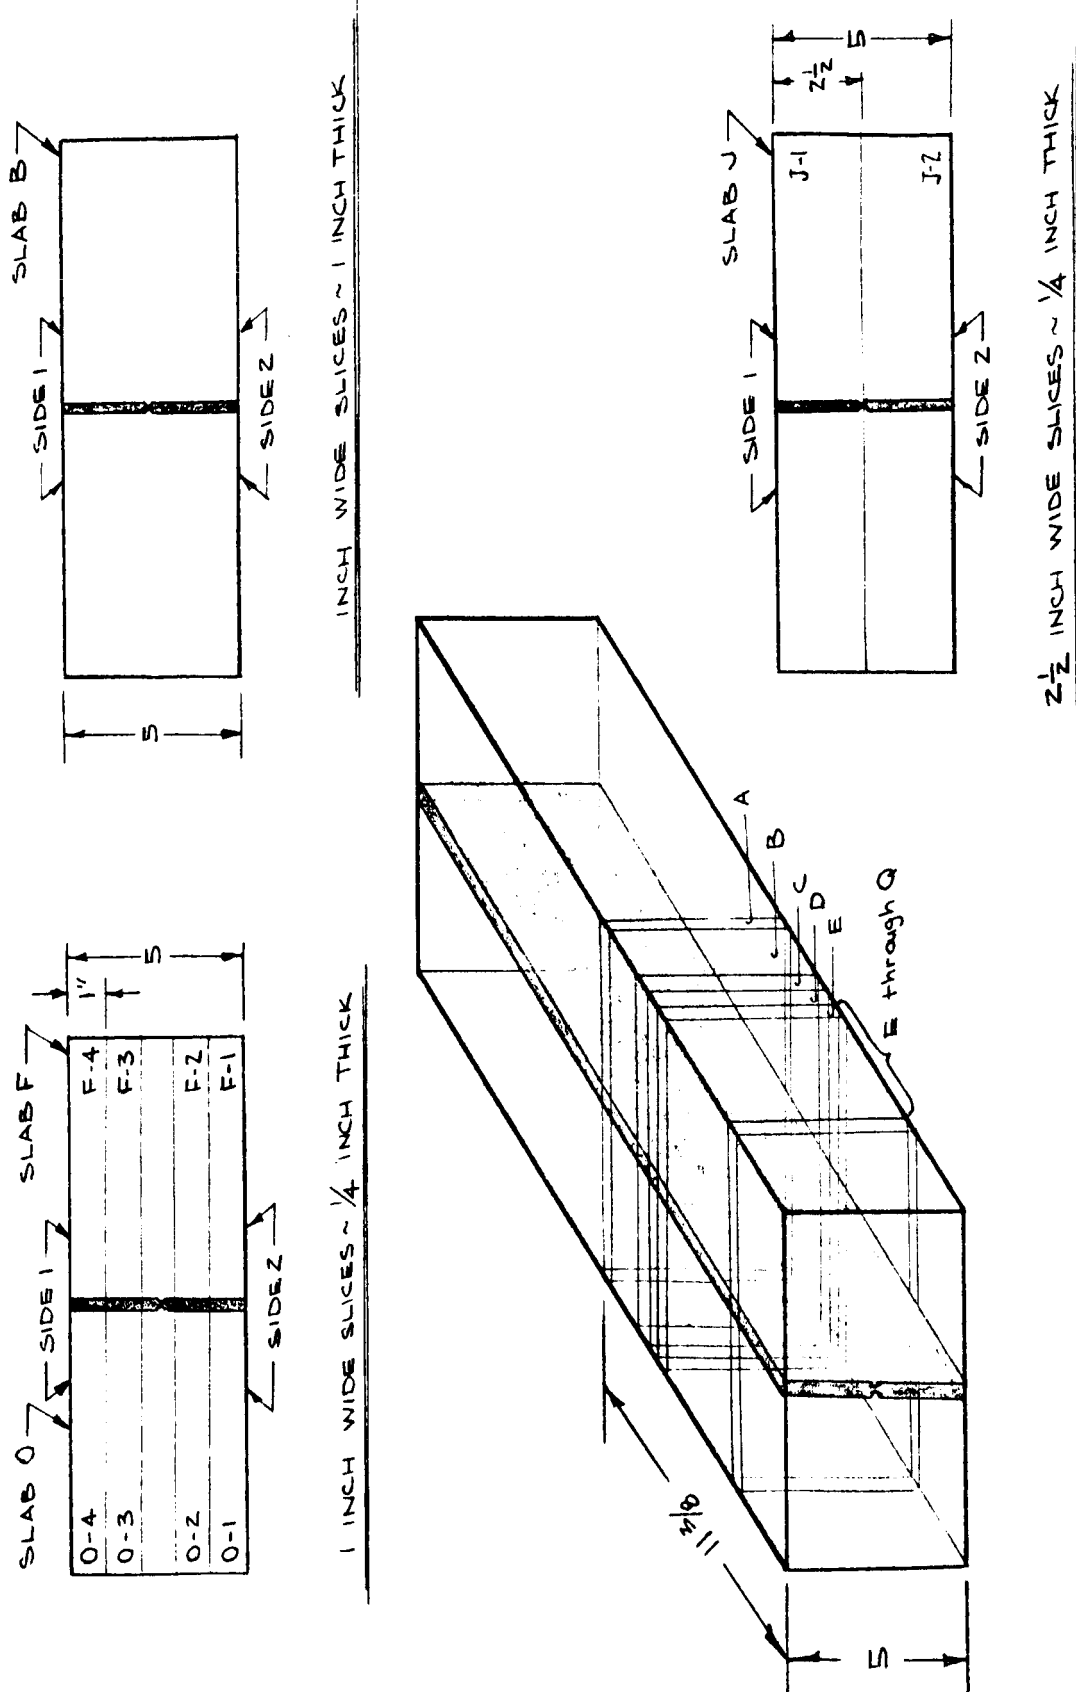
LOCATION OF TENSILE SECTIONS FROM WELD V-20
